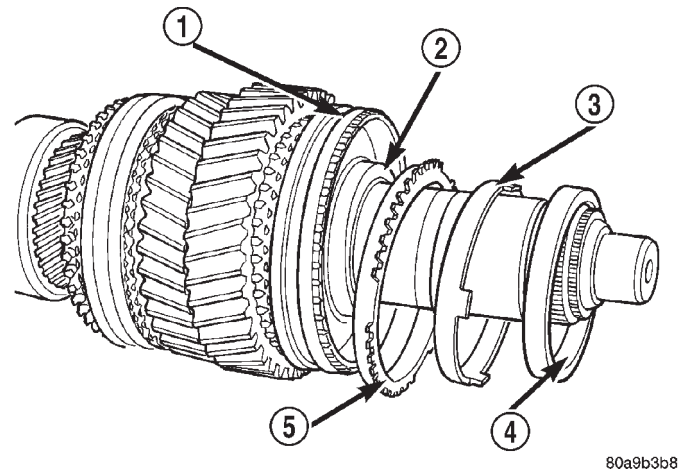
SECOND GEAR SYNCHRO RING AND CONES
